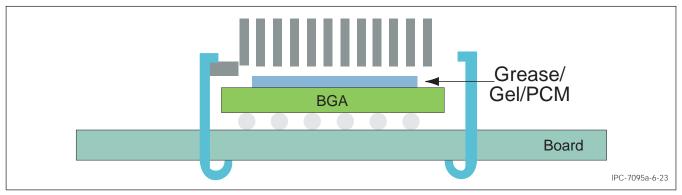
Heat Sink Attached to a BGA with a Clip that Hooks into a Through-Hole on the Printed Circuit Board
